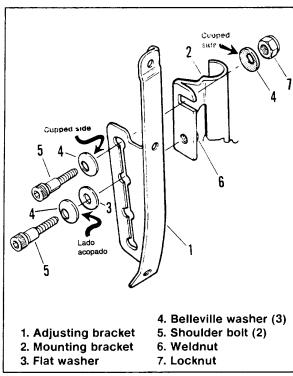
FXRP-Windshield -- New Windshield Mounting Hardware -- Right Side
